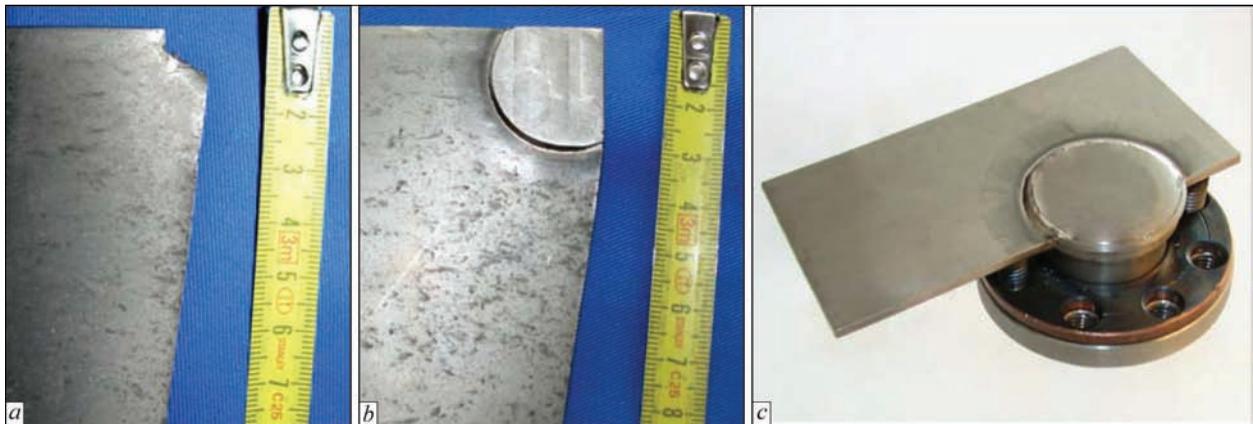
Repair of spot defects of angle of blade airfoil using cylinder repair «welded-in pieces»: *a* — damaged angle of blade before repair; *b* — repaired angle (ends of «welded-in piece» after EBW); *c* — assembly-welding fixture for EBW of cylinder «welded-in pieces» (blade simulator)
